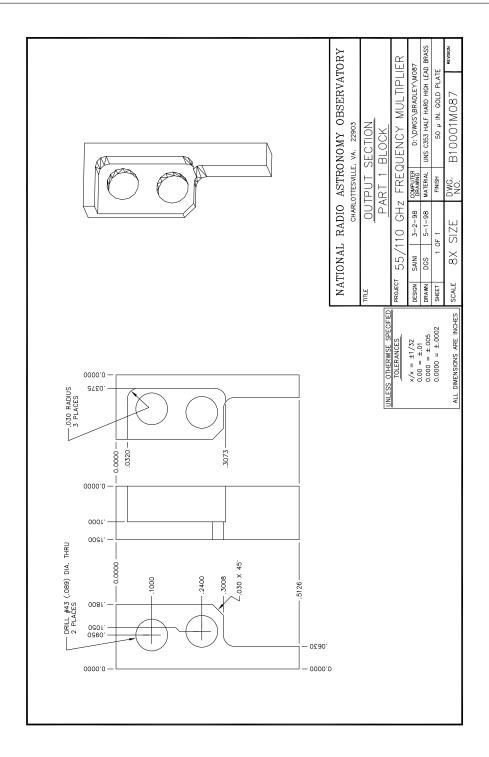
55/110 GHz frequency doubler: Mechanical details of the output section insert of part 1 of the two piece split block.
